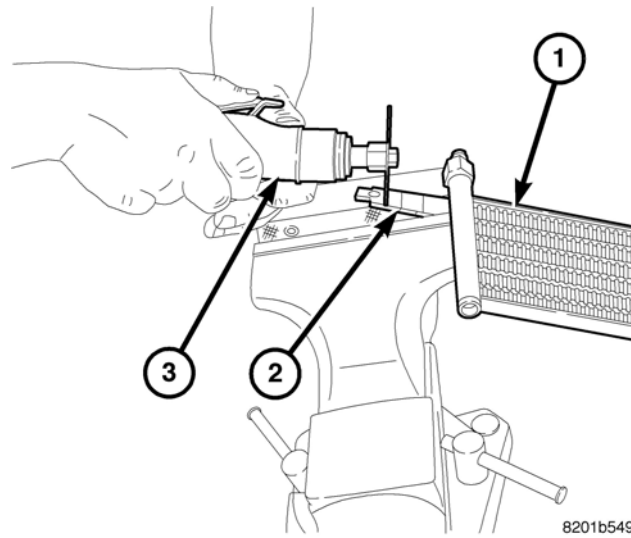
CUTTING LEFT TRANSMISSION COOLER BRACKET TAB
